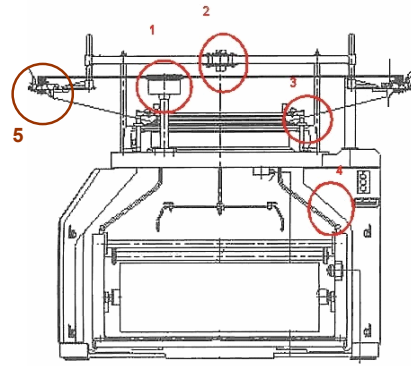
Assembling of the sensors on an industrial knitting machine.
